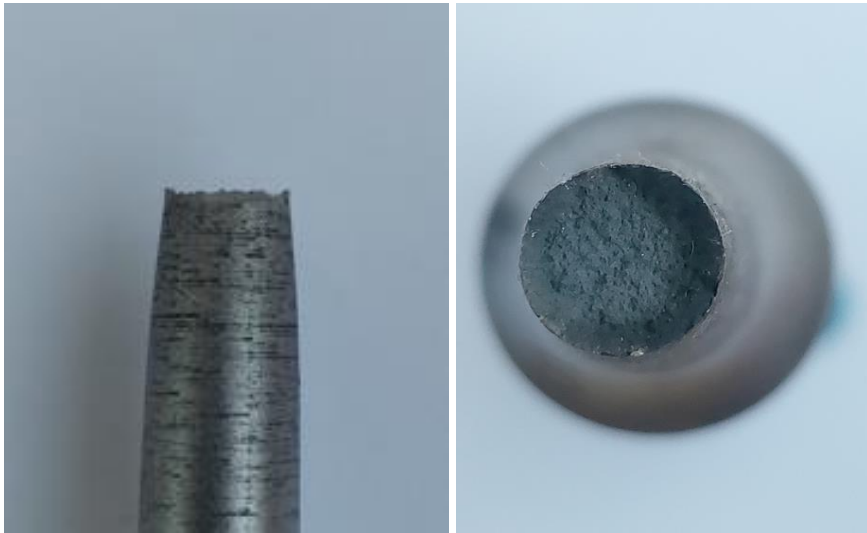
Side and Top Views of Fracture Surface at Fatigue Test 3
